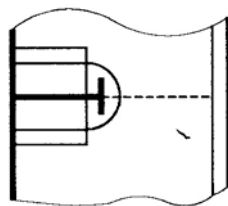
End connection of ordinary stiffener with two large collar plates
